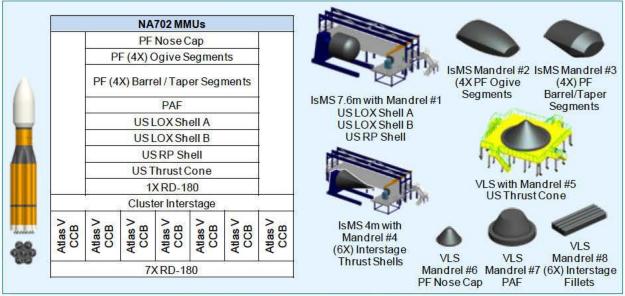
NA702 Major Manufacturing Units and Tooling
